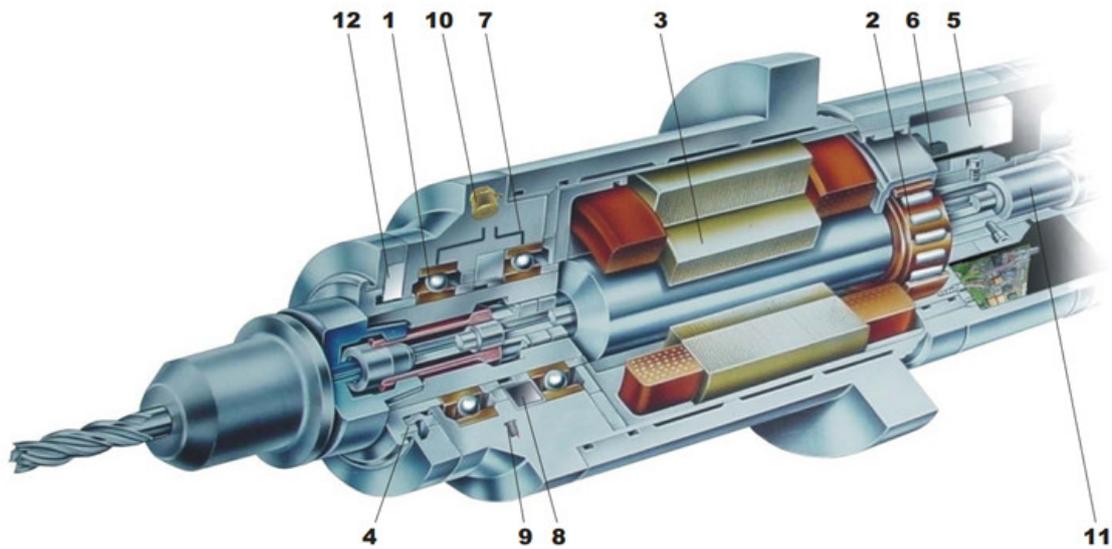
NC machine tool spindle system (from Step-Tec GmbH).
